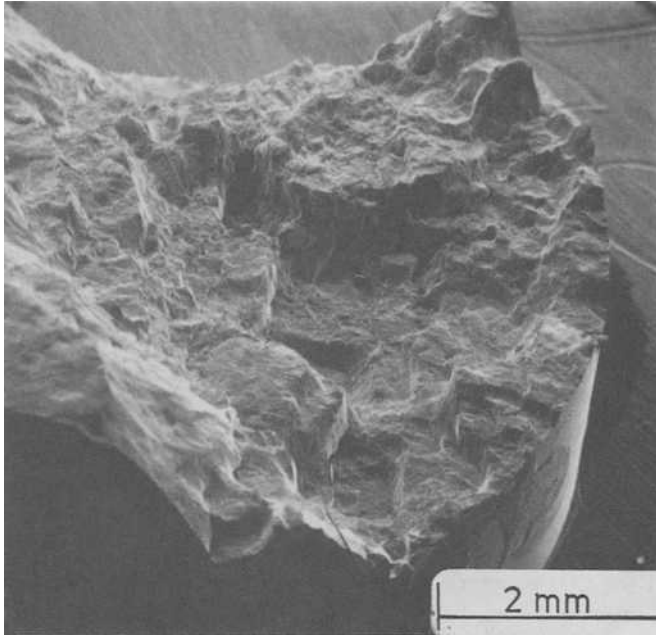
Fracture surface of vacuum tested specimen revealing multiple subsurface crack initiation sites.
